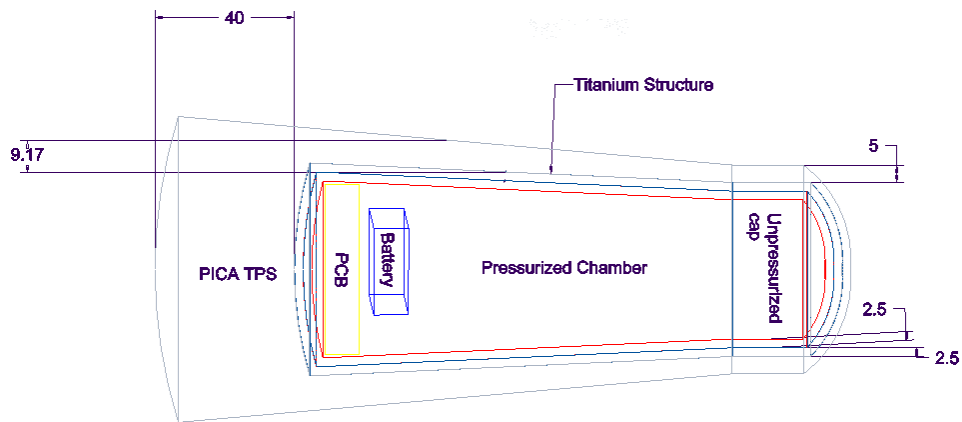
Internal Structure of the capsule (dimensions in mm)
